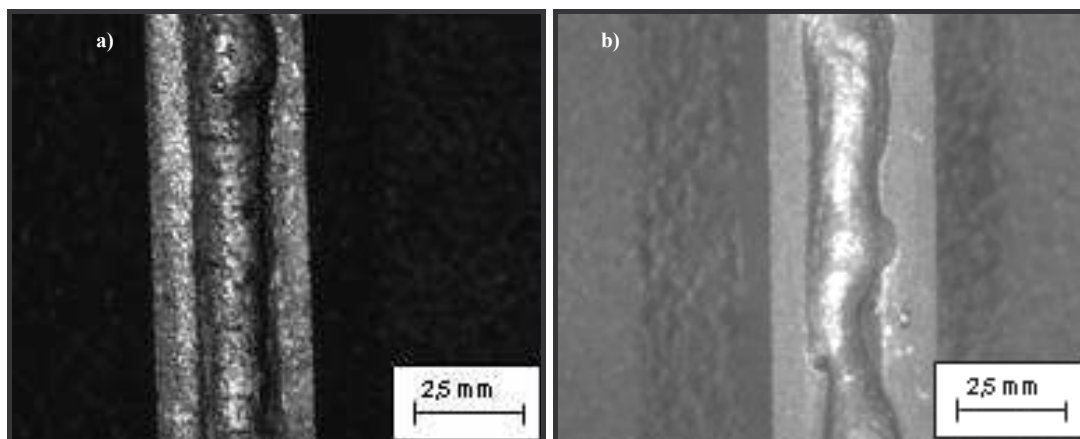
Welds fabricated using different conditions with a 0.9 bar N₂ overpressure.
